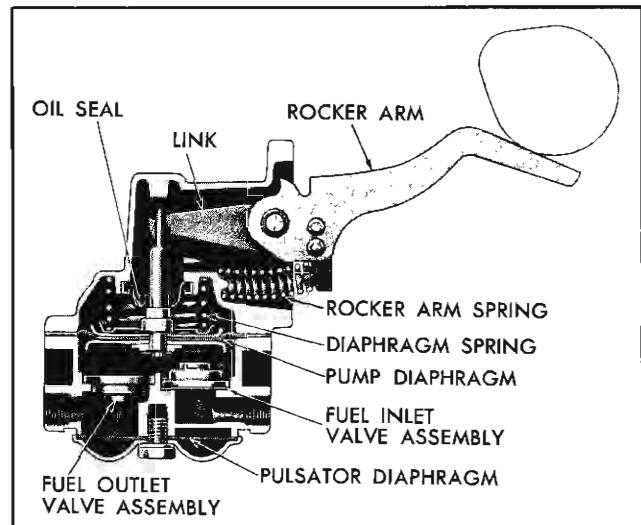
B-128 Schematic View Fuel Pump (4 Cyl.)
